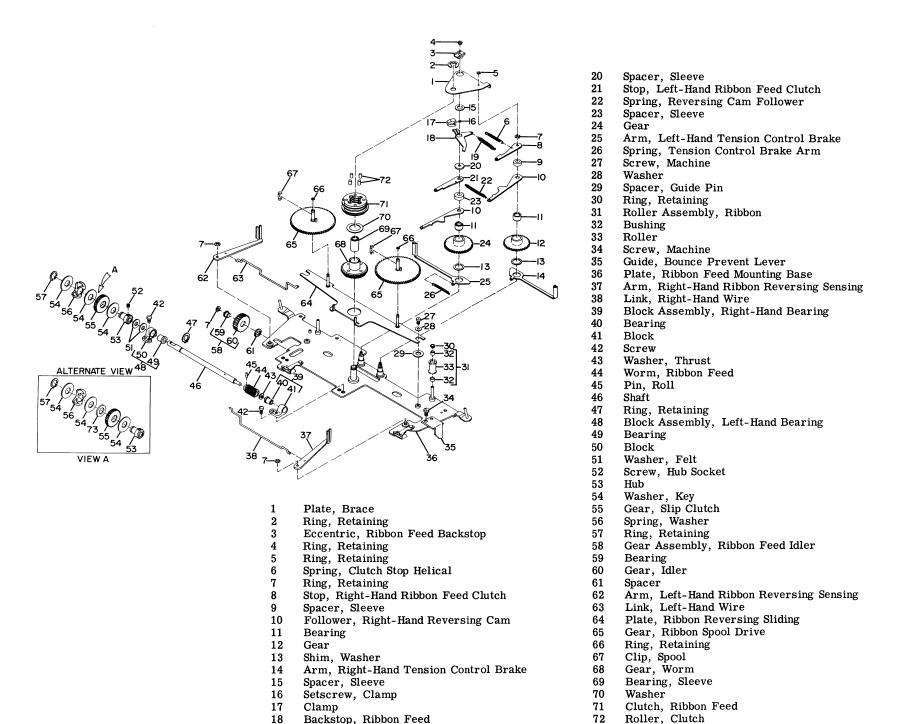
Front Frame Assembly (Rear View) SL-4-03315B Figure 15A
